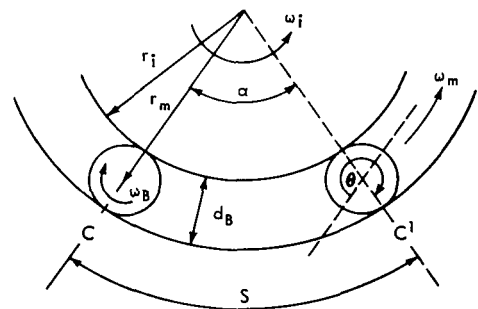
Schematic diagram showing ball bearings and inner and outer races.
